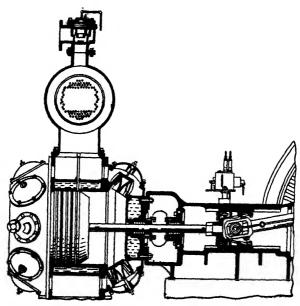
Inlet and discharge valves carried in extensions on cylinder heads. (Courtesy of Power.)
